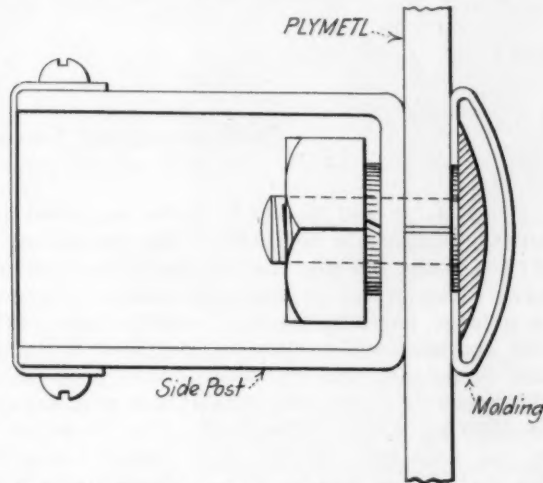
TYPE OF MOLDING USED TO ATTACH SIDE PANELS
